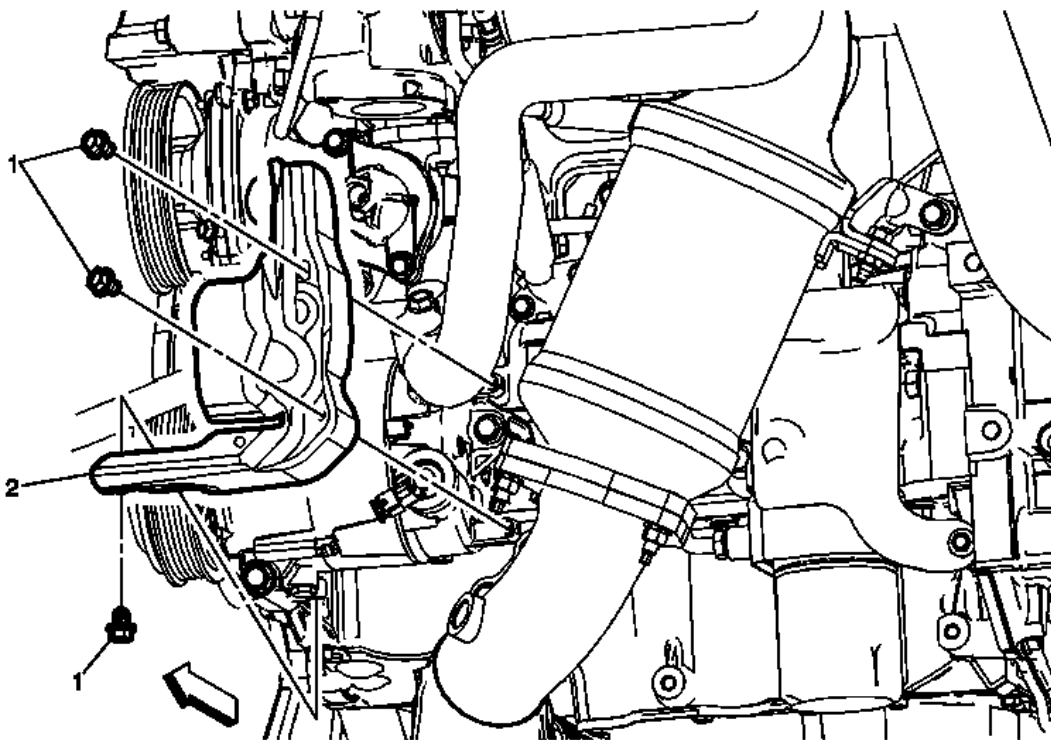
Air Conditioning Compressor Heat Shield (LTG)
